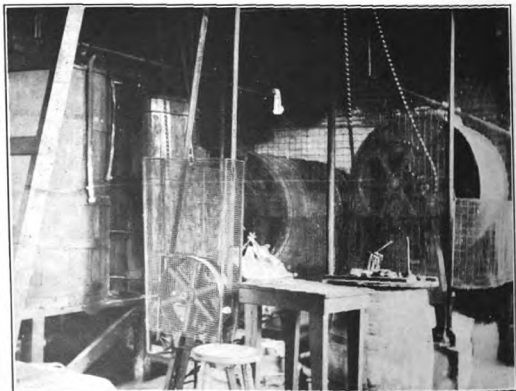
GLAZE MIXING ROOM, SHOWING MACHINERY FOR MIXING GLAZE AND SAFETY GUARDS ON MACHINERY.
